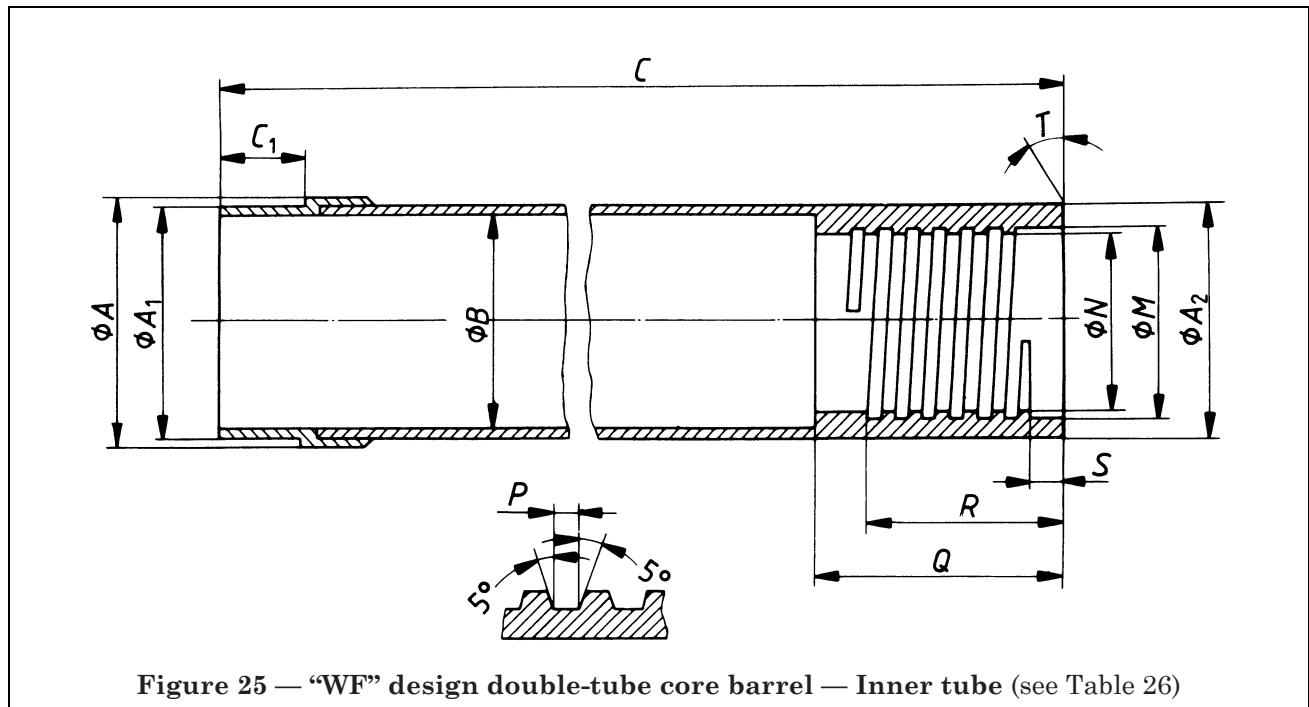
“WF” design double-tube core barrel — Inner tube (see Table 26)
